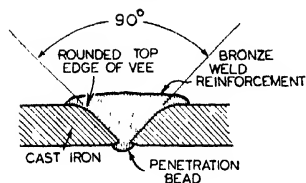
CROSS SECTION THROUGH BRONZE WELDED CAST IRON, SHOWING V-ing TECHNIQUE
